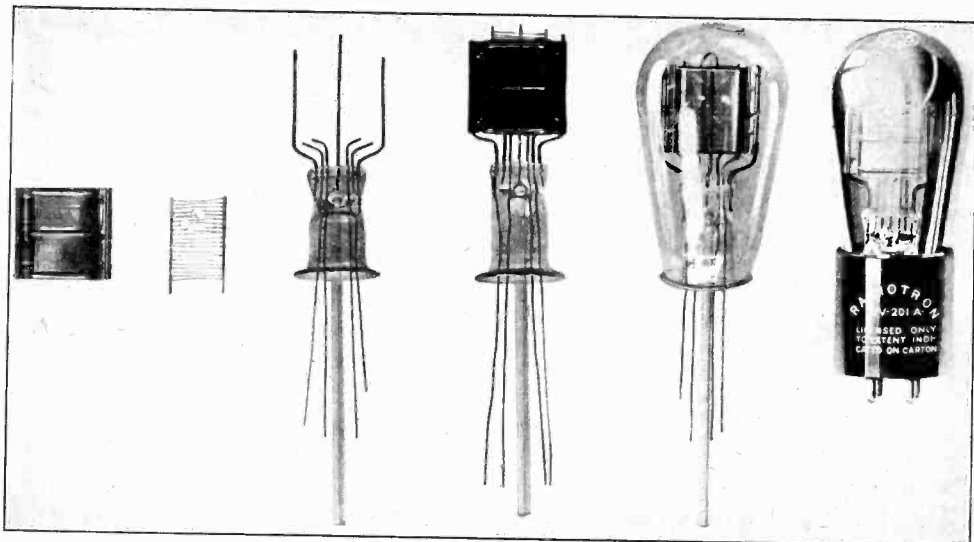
Stages in the assembly of a standard three-electrode vacuum tube.
